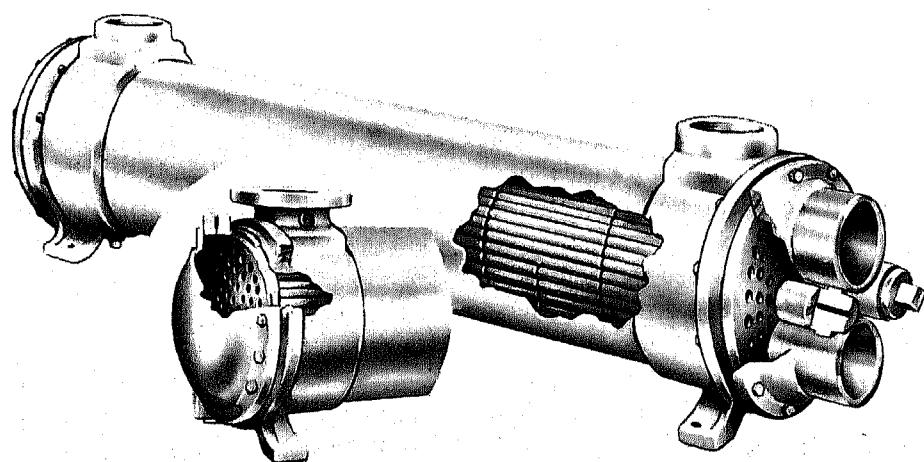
Cutaway view of a tube-and-shell heat exchanger.
